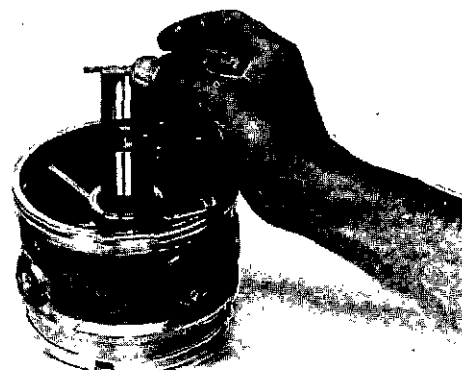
, (T465061). Remove the turbocharger bearing from the bearing housing
